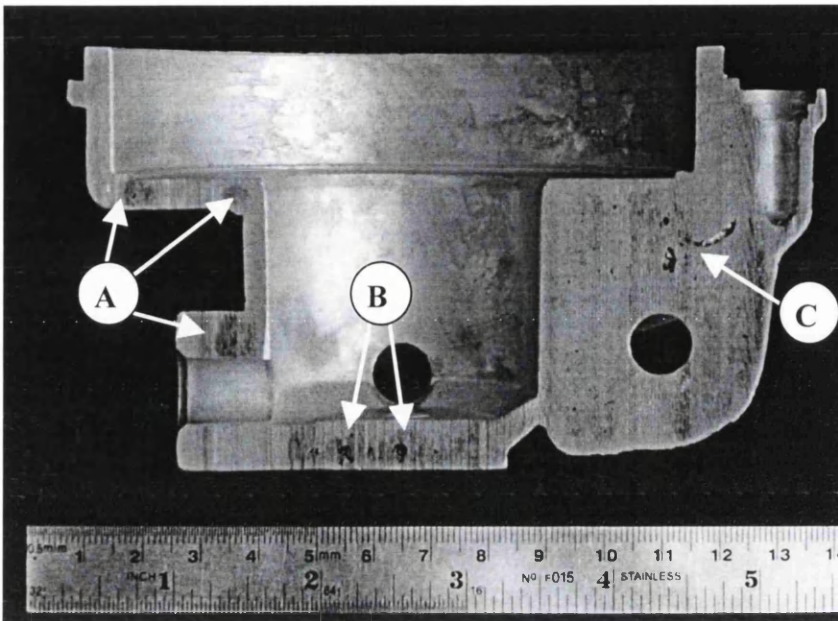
Photograph of test piece 2 showing its dimension and location of porosity formation
